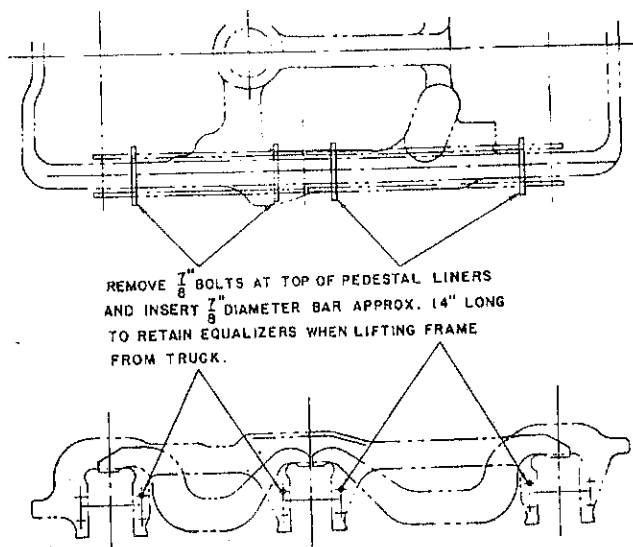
DISASSEMBLY-THREE MOTOR TRUCK
